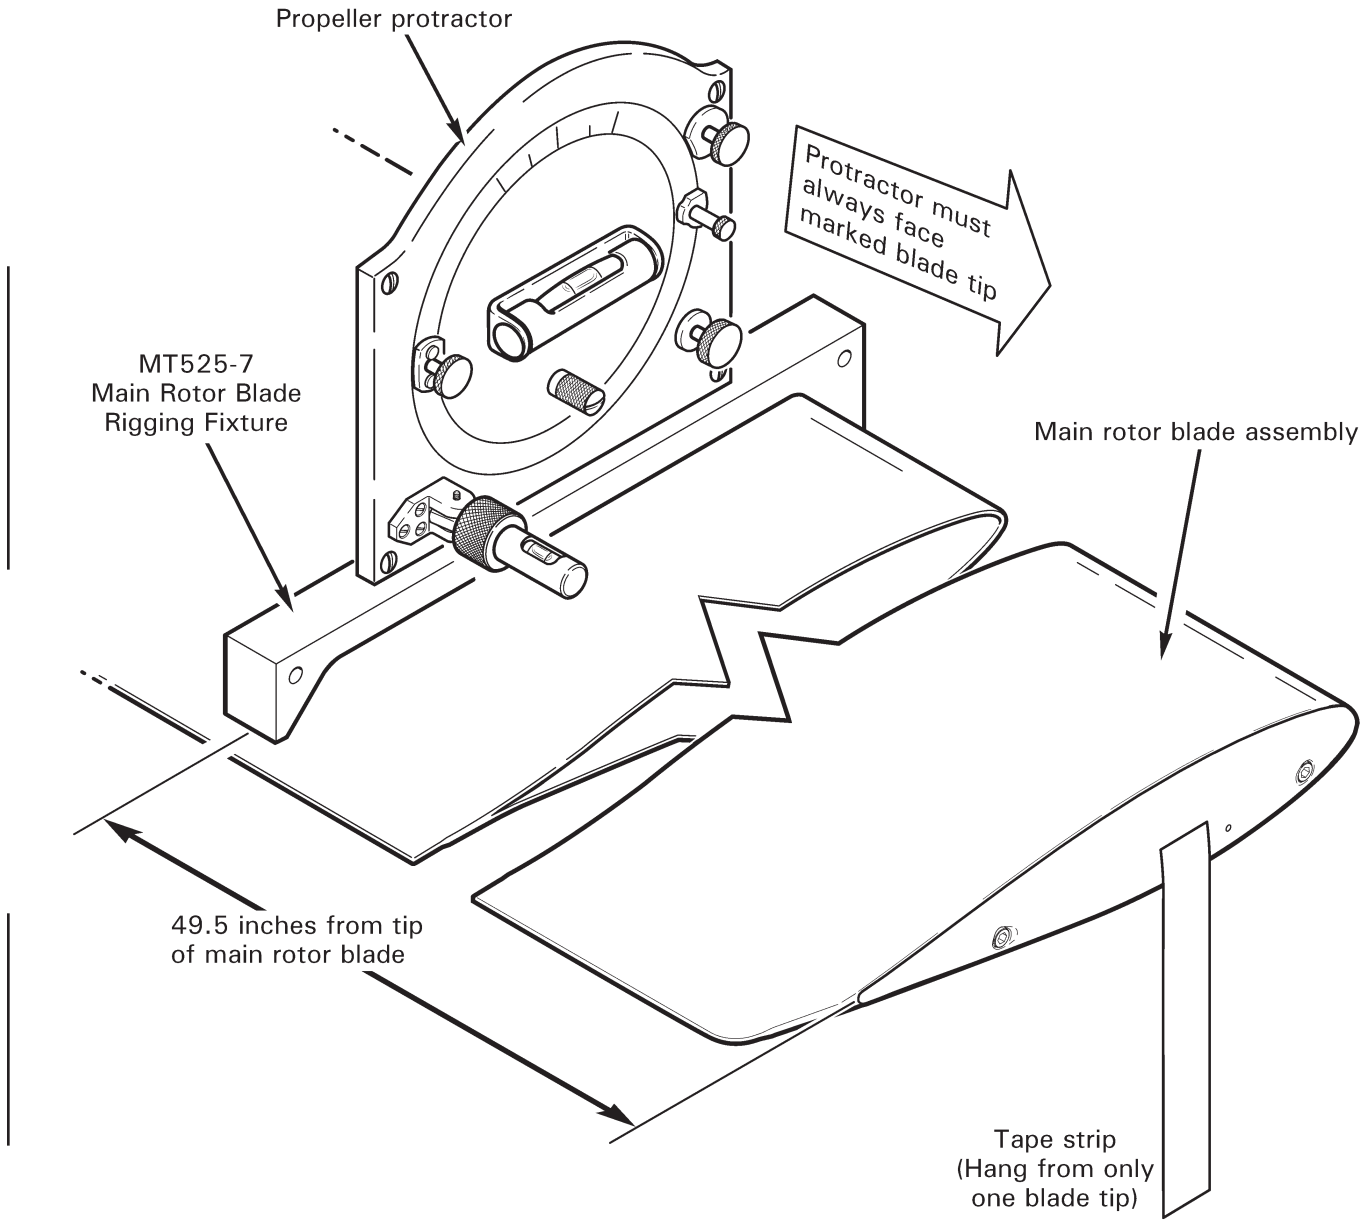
MAIN ROTOR BLADE RIGGING
